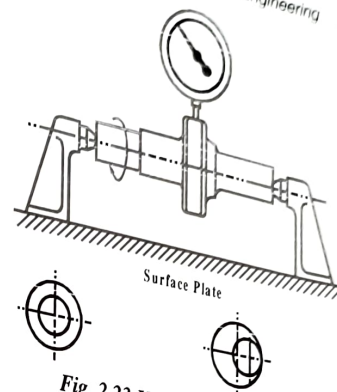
Use of Dial Gauge to Check Concentricity
